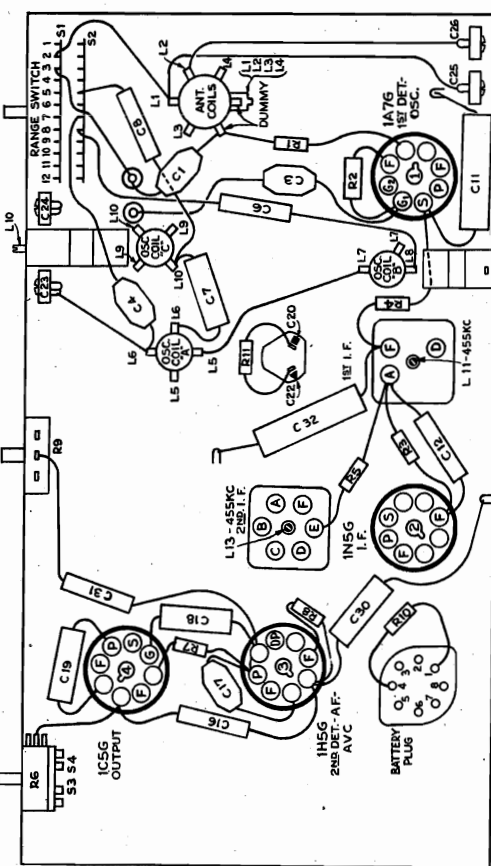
TUBE, TRIMMER AND PARTS LOCATION—BOTTOM VIEW
